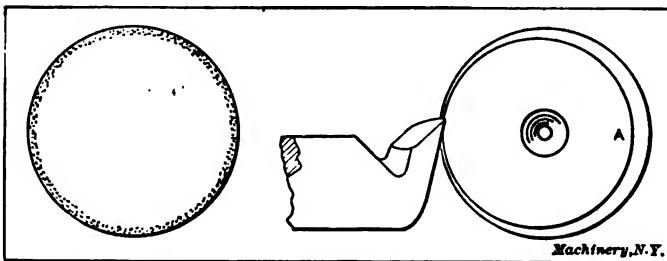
Tool Steel should be centered Concentric, in order to remove the Decarbonized Outer Surface
